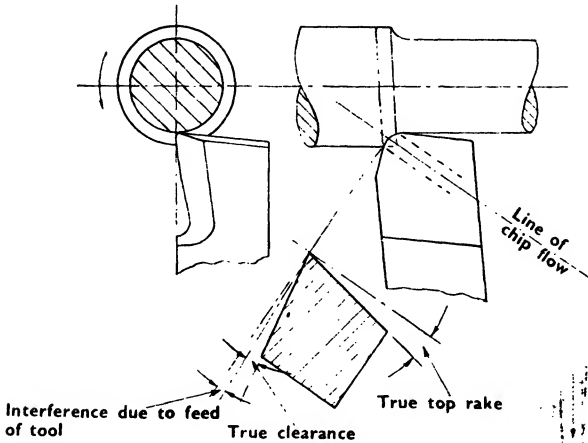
A. DIAGRAM SHOWING TOOL ANGLES FOR A TURNING TOOL
